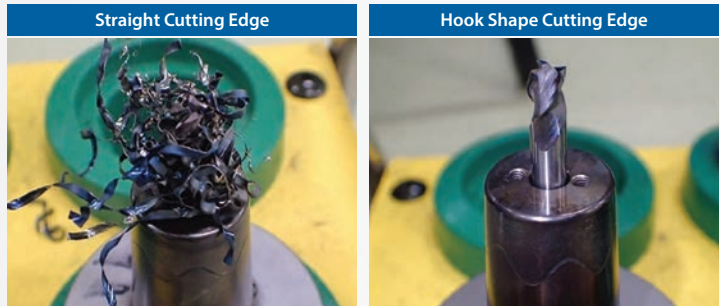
Condition of end mills after plunging 37 holes in SUS304. Cutting chips are wrapped around the straight cutting edge end mill whereas the AE-VTSS with hook shape cutting edge can continued to be used.
